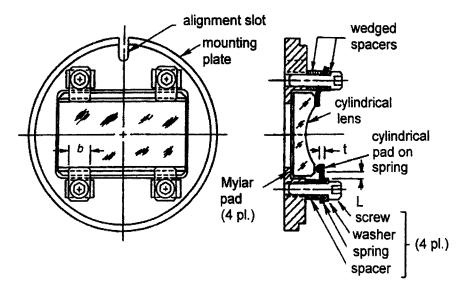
Schematic diagram of a mounting for a cylindrical lens.
